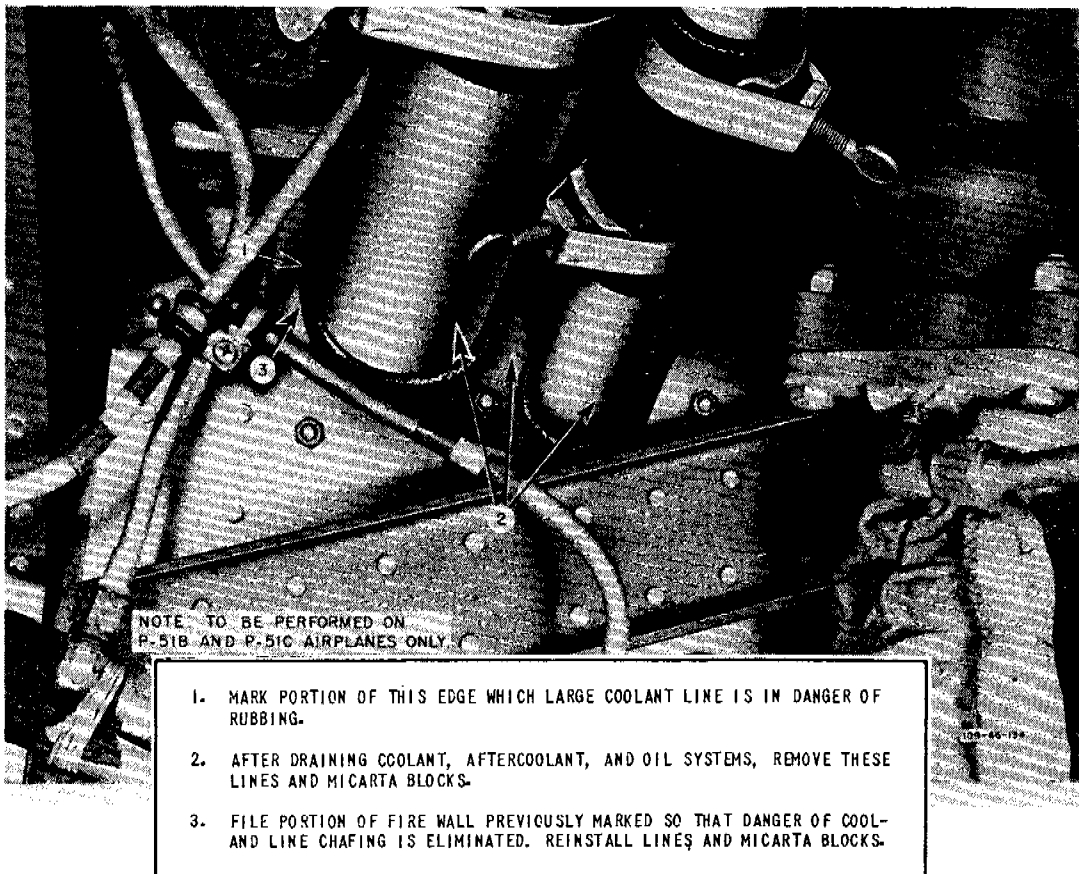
View Looking Forward at Fire Wall From Left Wheel Well
